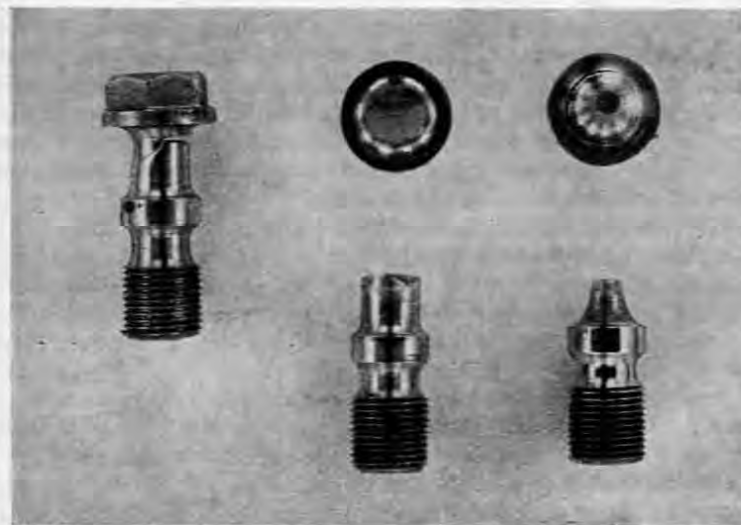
Modified M 12/1 bolt satisfactory in operation. Left: fatigue fracture, right: static fracture.
